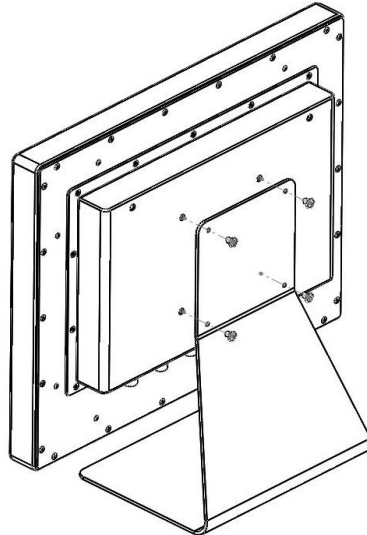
AEx-9XXAP(H) Series VESA Mounting
